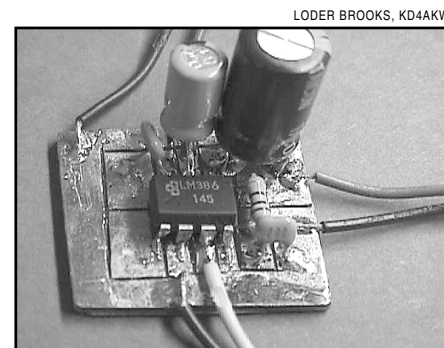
An LM386 audio amplifier built on a homemade PC board. The board's isolated pads are made by using a hobby tool to grind separating lines through the copper foil.
